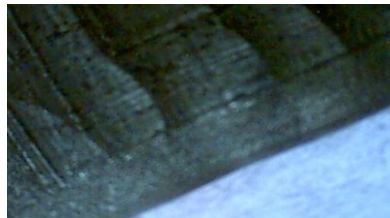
Surface cracks after 15 prints with standard non-magnetic toner (Lexmark C510)
